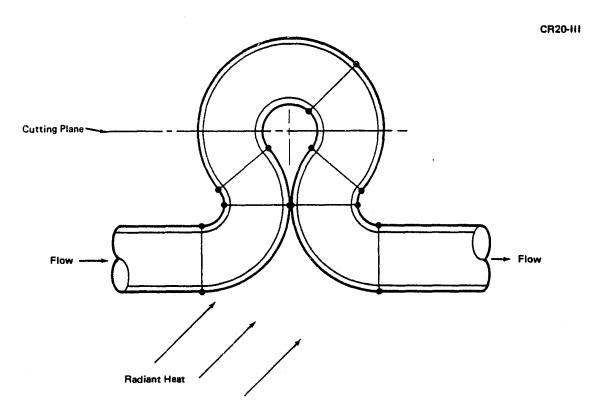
Omega Shaped Joint at Junction Between Two Absorber Sections
